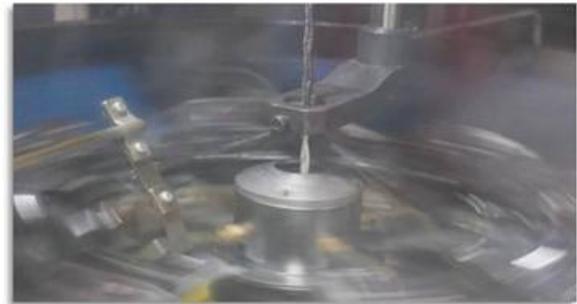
CNS Shielded Cable Under Construction at TE's Menlo Park Facility on an Industrial Braider
